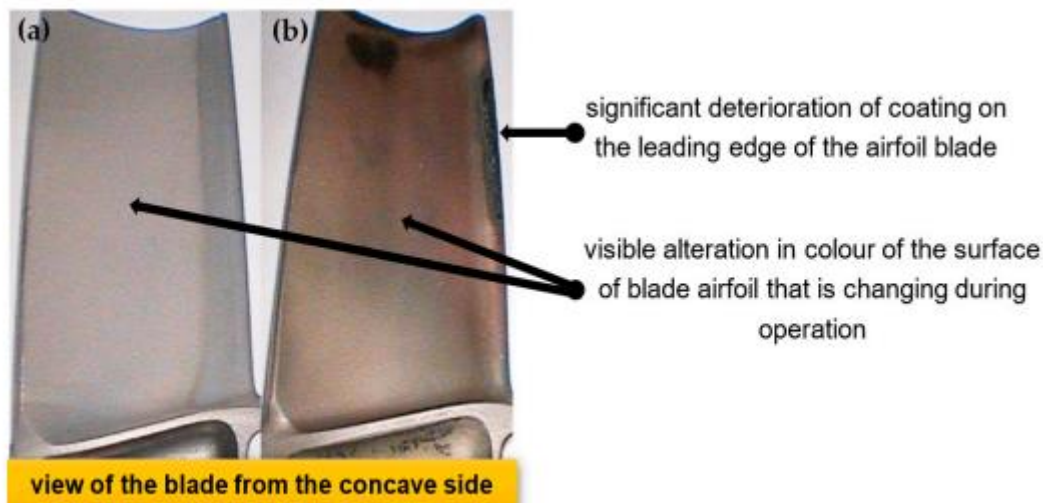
Exemplary blade images: (a) benchmark blade; (b) turbine blade leading edge damaged due to overheating
